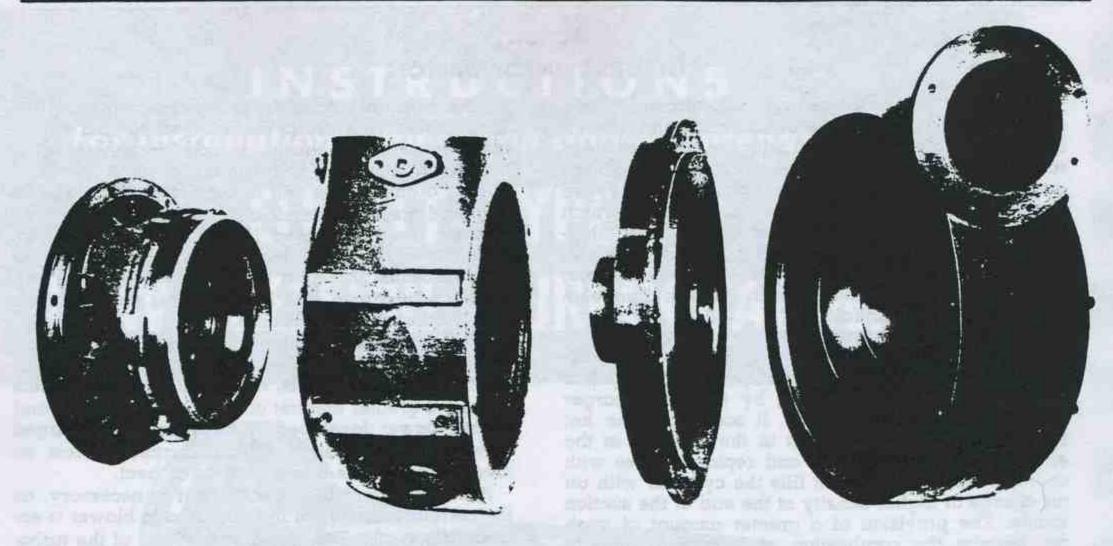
Left to right: Inlet Casing Assembly, Turbine Casing, Intermediate Casing, Blower Casing Assembly.
